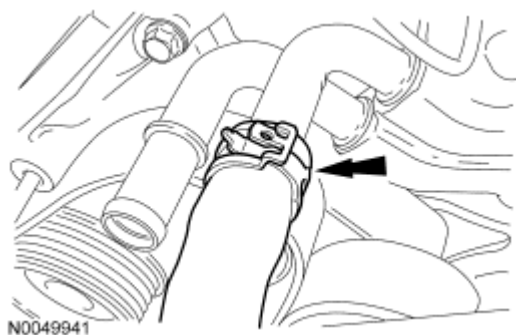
Locating Coolant Hose From Charge Air Cooler (CAC)
